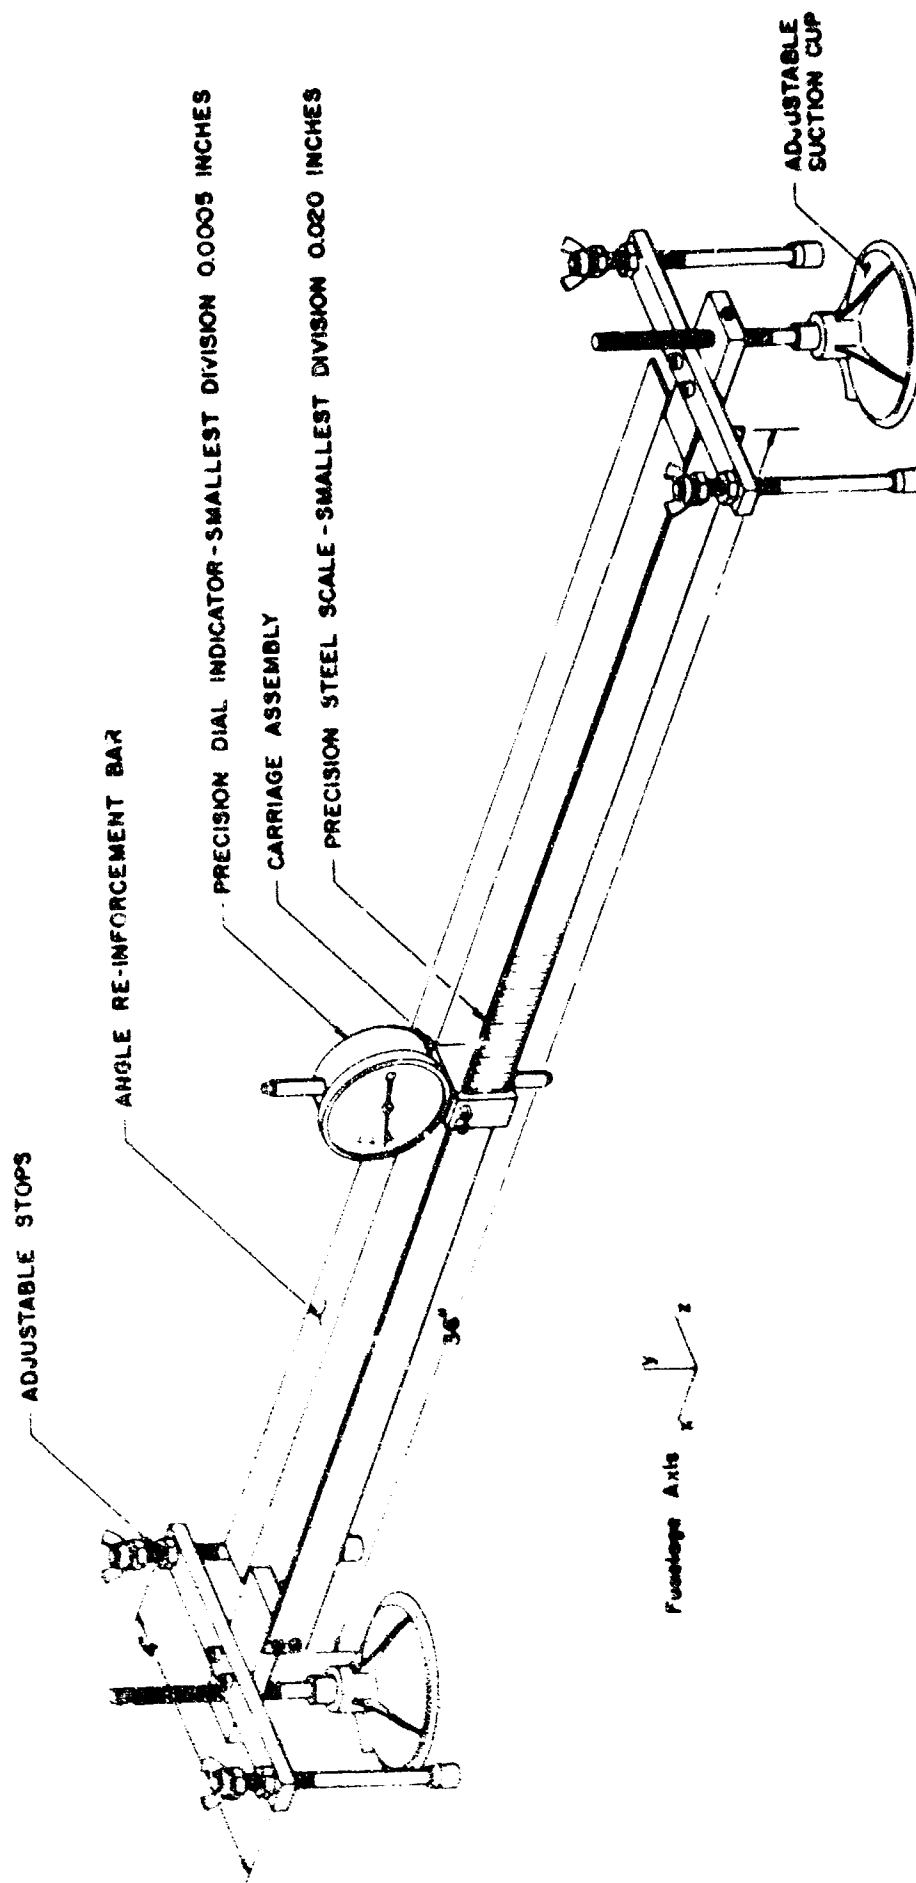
THE ASSEMBLY USED TO MEASURE SKIN DEFORMATIONS ON THE TYPE A AND B AIRCRAFT
